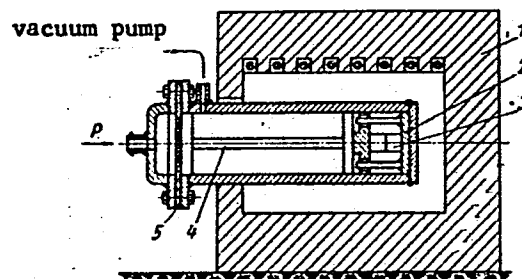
Diagram of diffusion welding in box furnace
